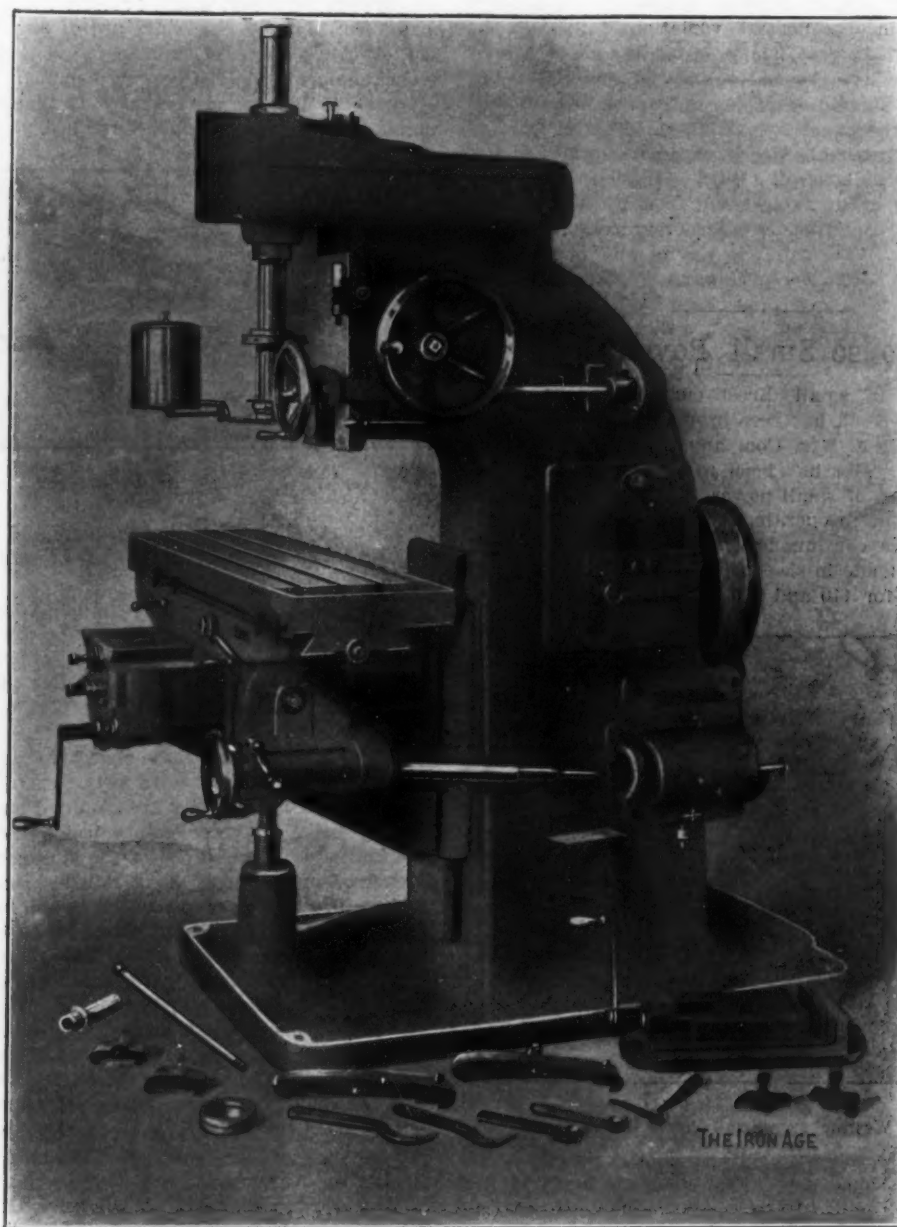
The Brown & Sharpe New Vertical Spindle Milling Machine.
